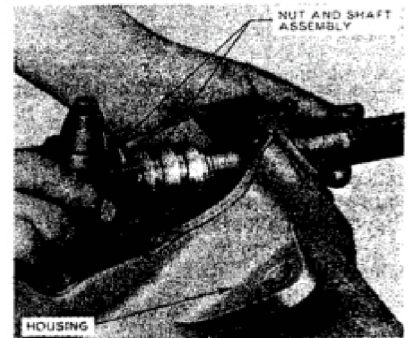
Removing the ball nut and steering shaft assembly from gear housing.
